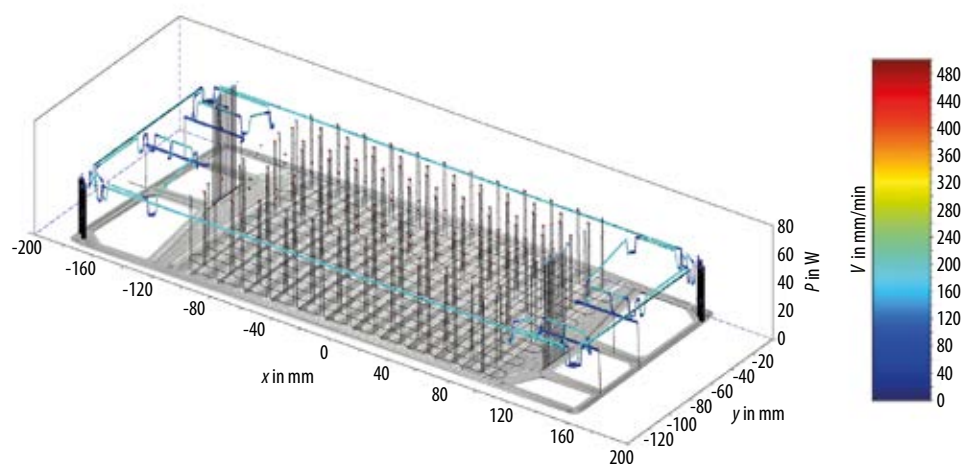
When welding bipolar plates, 50 μm thick foils must be reproducibly tight and precisely welded, with a positioning accuracy of less than 100 μm for plate sizes of about 340 mm $\times$ 130 mm.
